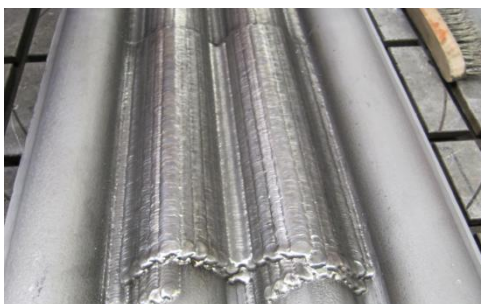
Fintube panel with 2 layers of weld overlaywelded with CMT
